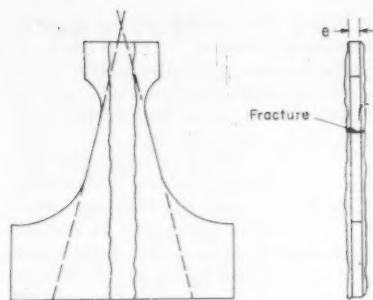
Test specimen with weld parallel to specimen axis. Welded on one side only—Series E.
